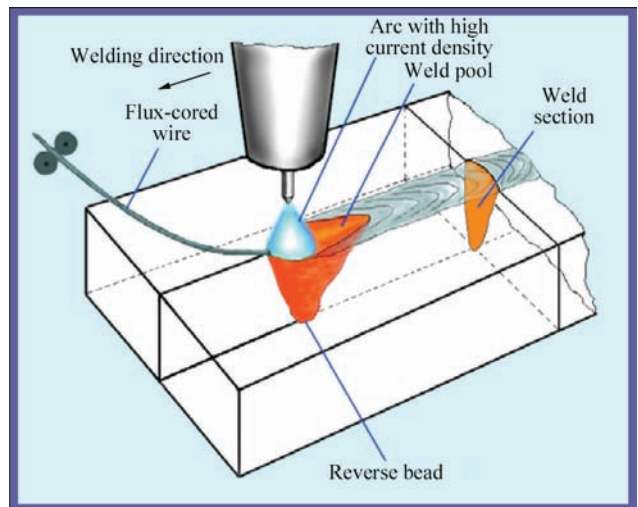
Schematic of TIG welding with flux-cored wire
